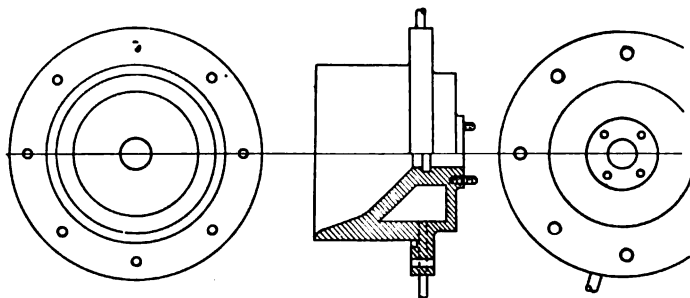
Standard Fuel Oil two cycle Diesel cylinder head.
